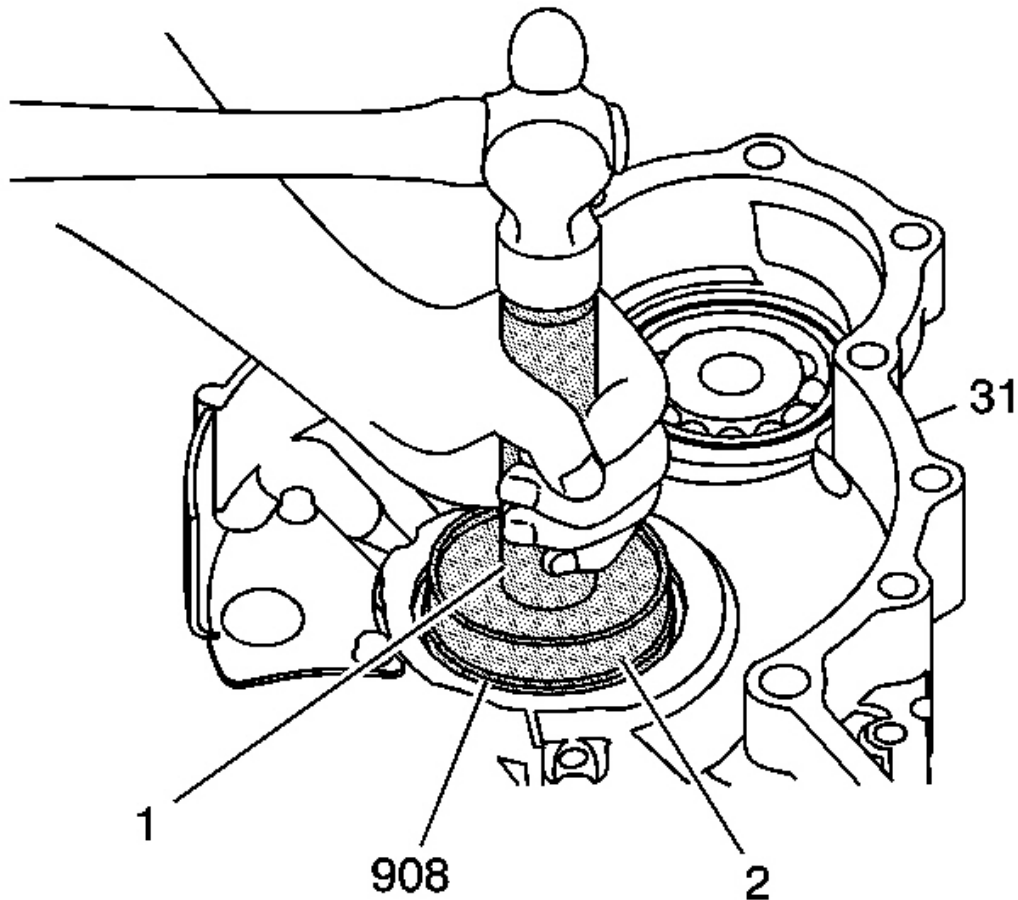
Installing The Front Differential Tapered Rear Roller Bearing Race Using DT 46428 & EN 46342
